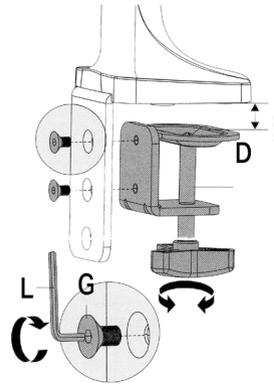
Attach clamp mechanism D to angled bracket C.
